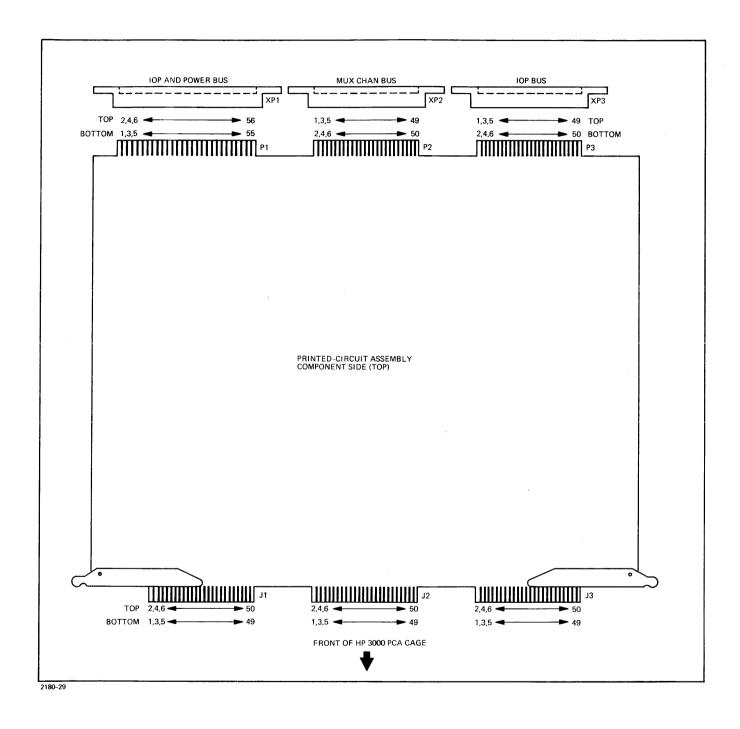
Printed Circuit Assembly Connector Pin Indexing Diagram
